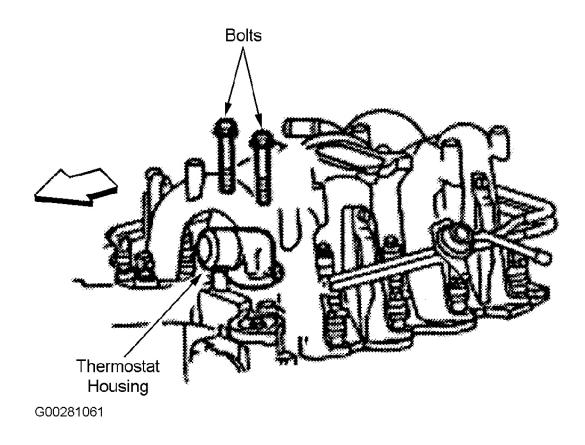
Removing/Installing Thermostat Housing Courtesy of FORD MOTOR CO.
